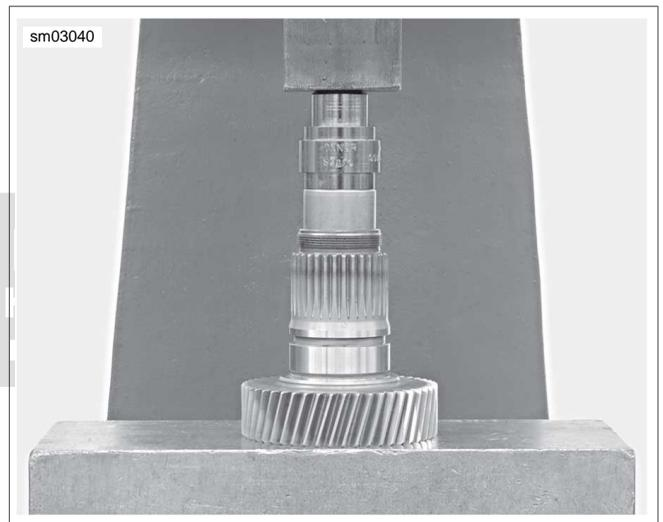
Installing Clutch Side Needle Bearing in Main Drive Gear
